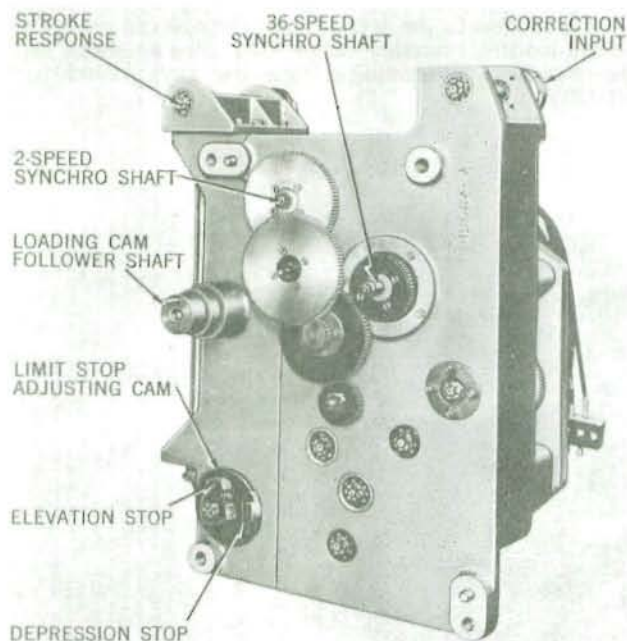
Elevation Receiver-Regulator Mk 10 Mod 0, Gear Train Assembly, Front View
